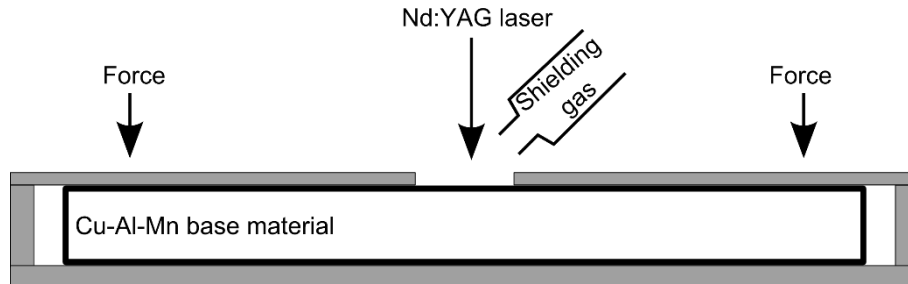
Fixture, laser and shield gas position for welding the CuAlMn shape memory alloy.
